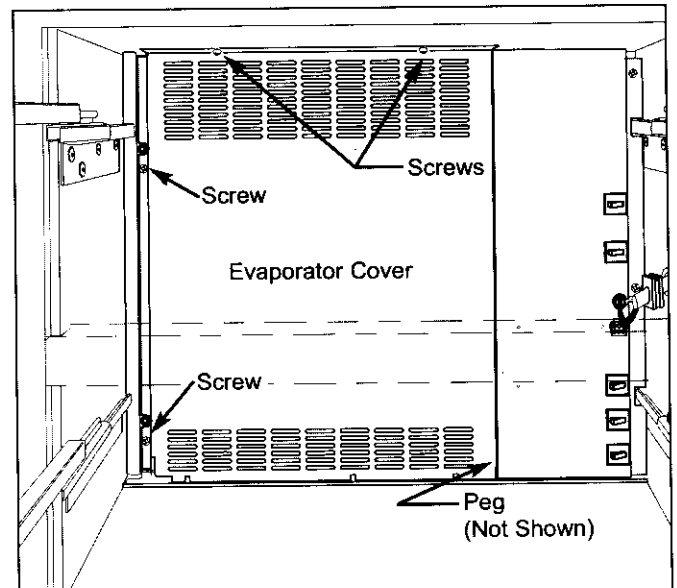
Evaporator Cover Removal, Model 736TC/I-3 Shown
